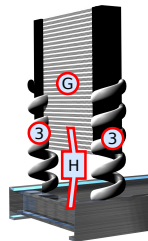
Exploded view of the L1 link between the frame and the radiator.
